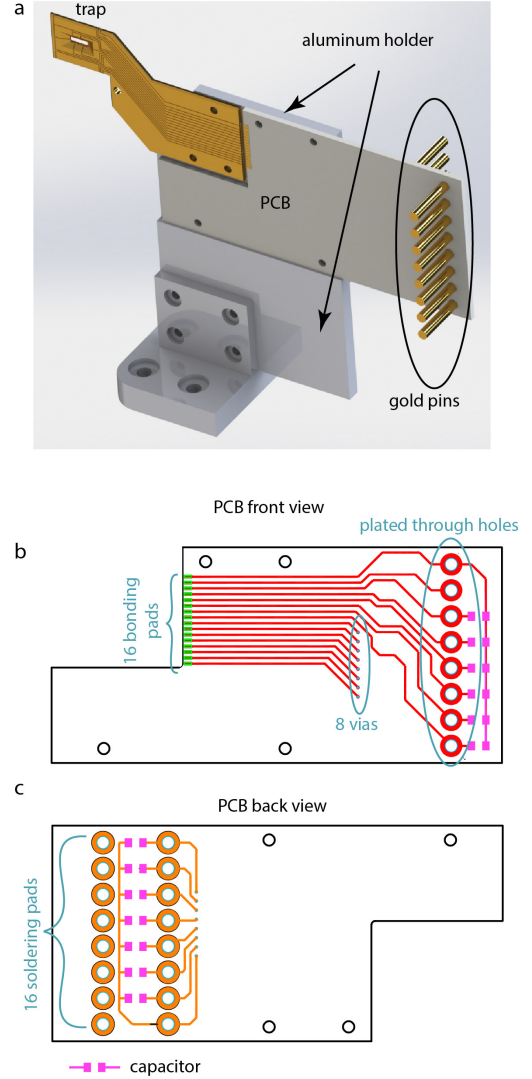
Trap holder and filter PCB. Both the trap and the PCB filter are mounted on an aluminum holder. The trap is wire-bonded to the PCB which has conducting paths, capacitors and pins for connection to the DC and RF sources.
